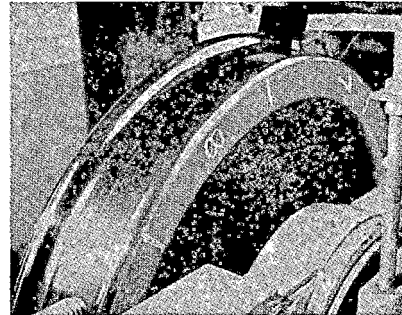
Polished tread and flange condition of wheel No. 413 after fifty 150 mph stops with a flanged COBRA brake shoe
